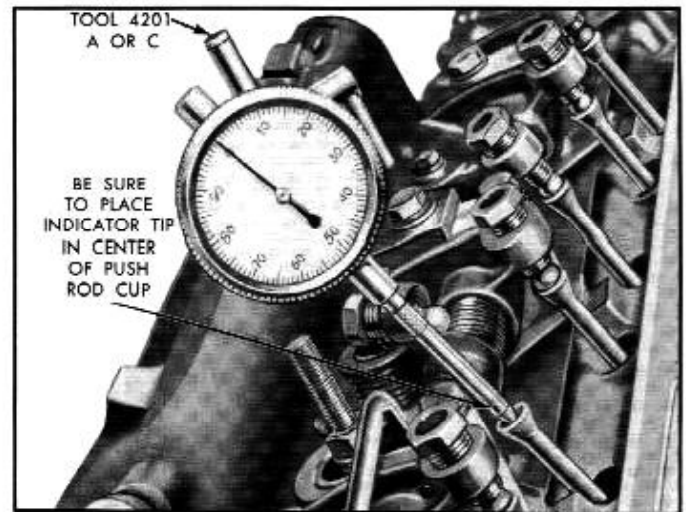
A-13—Checking Cam Lobe Lift—Typical
